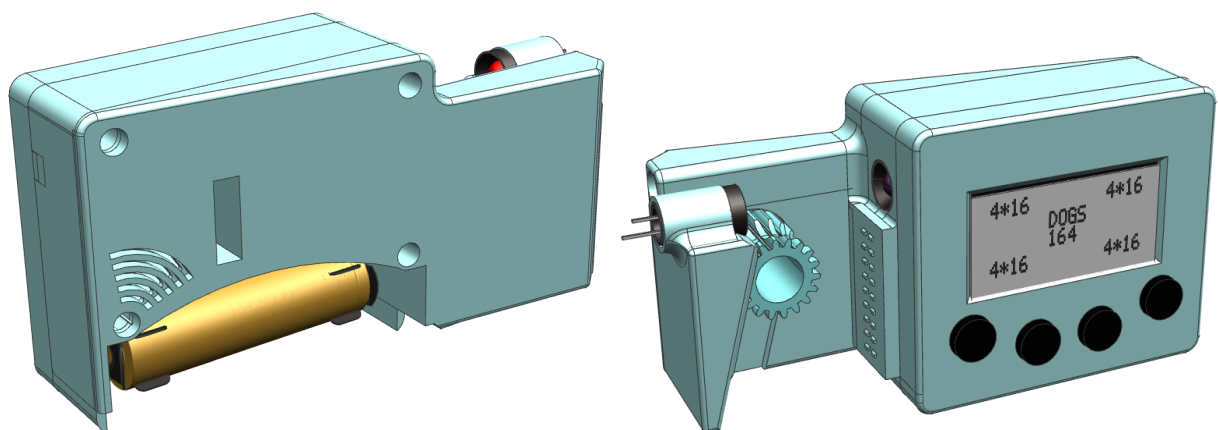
Two CAD perspectives of the fully assembled device, highlighting sensor arm, LCD interface, and clip geometry.
